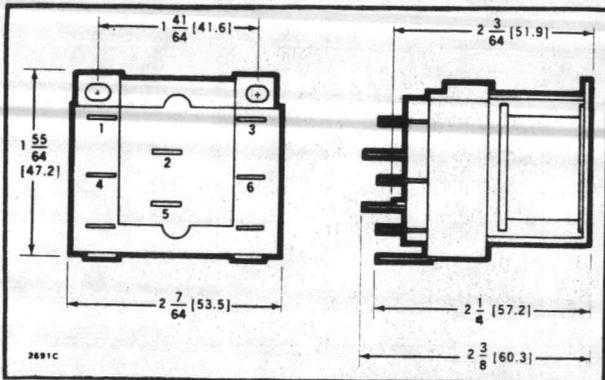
RELAY DIMENSIONS IN in. [mm IN BRACKETS].
